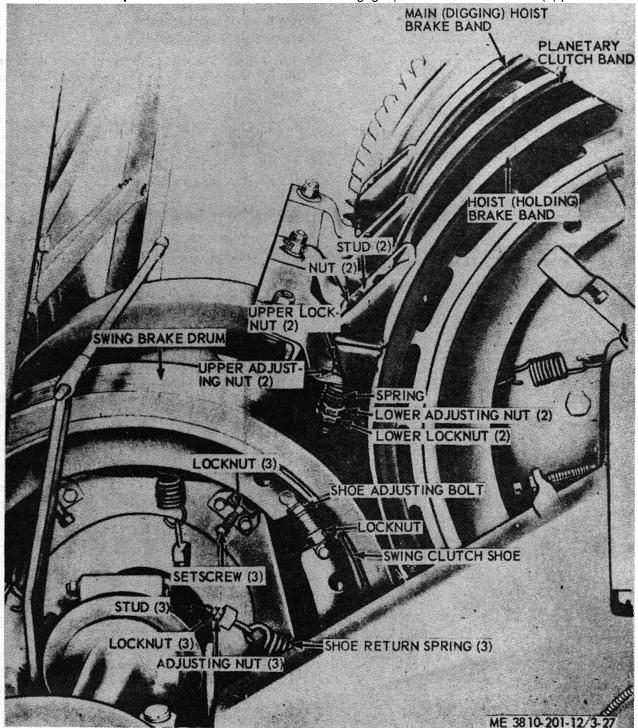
Swing clutch shoe lining wear adjustment and positioning of hoist drum clutch and brake bands. 3-30
